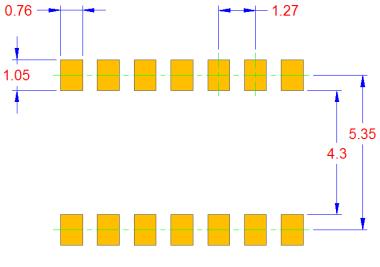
14-Pin SOIC Package Drawings Detail "A"
